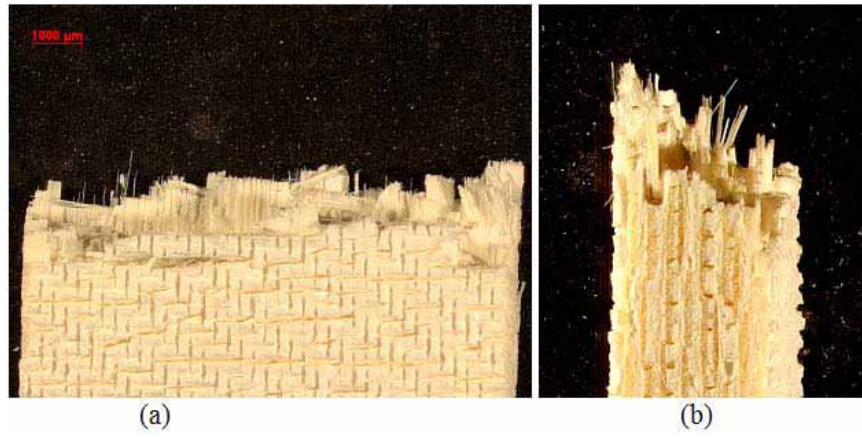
Fracture surface of C4 composite specimen tested in creep at 37.5 MPa at 1100 °C in steam ($t_f = 51.9$ h): (a) front view and (b) side view.
